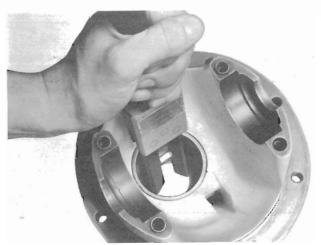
Using tool 180. S123A to remove pinion bearing outer rings
